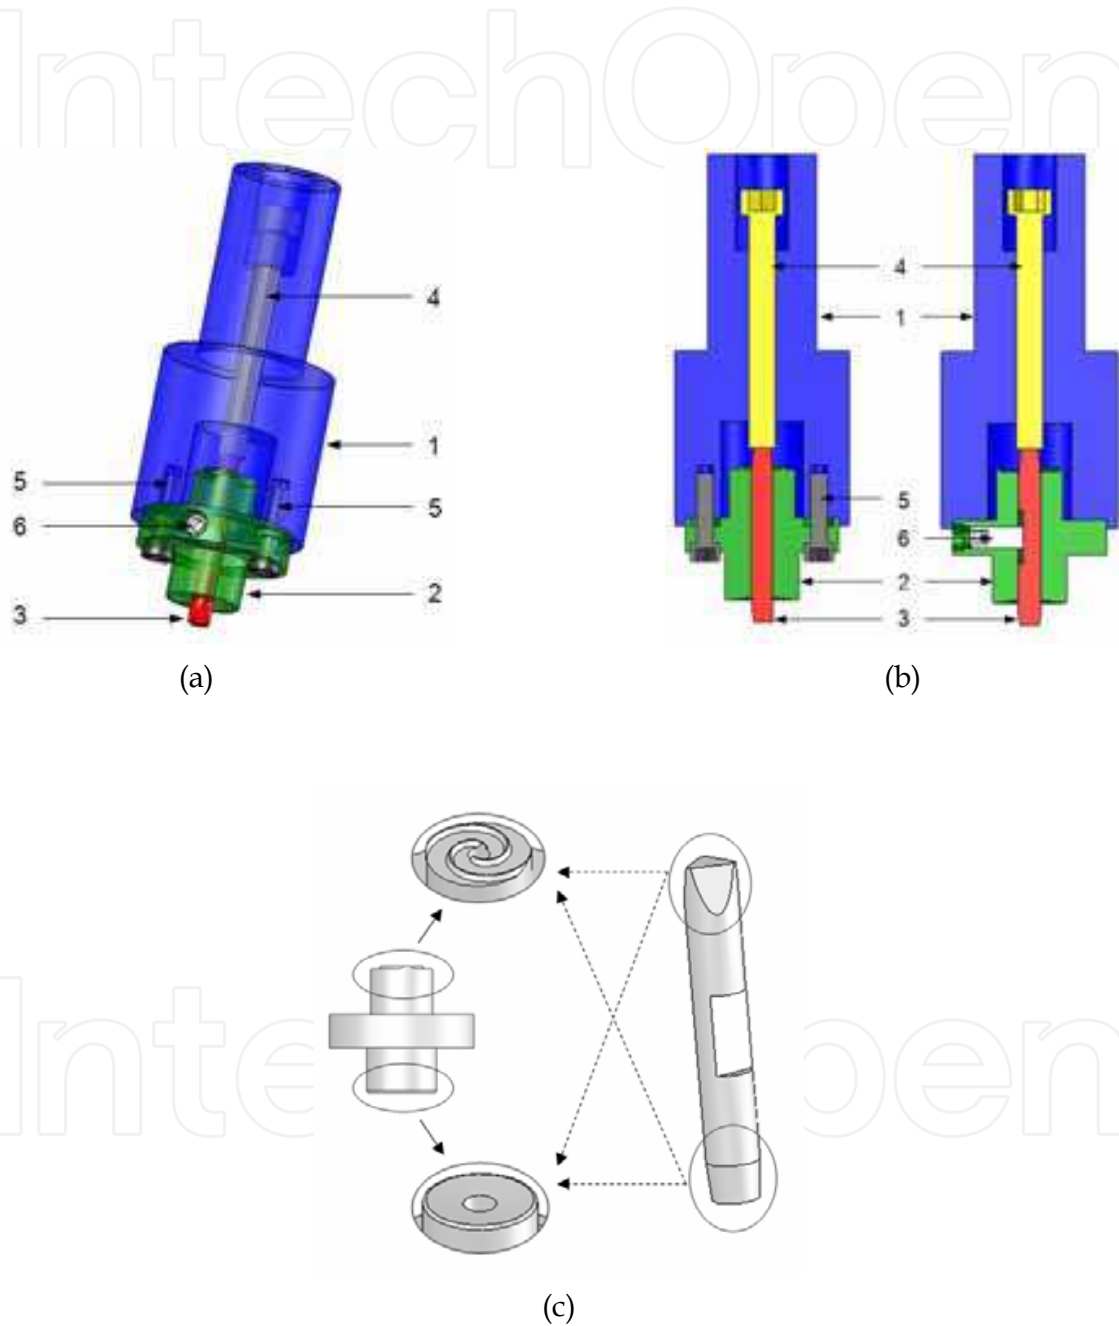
Modular dual FSW tool. a) 3D view of assembly, b) Cutaway view in two perpendicular planes, c) Detail of geometric duality of the dual basis and probe dual. Nomenclature: main body (1), dual shoulder (2), dual-probe (3), vertical adjustment screw (4), bolts of the dual basis (5), dual screw probe (6).
